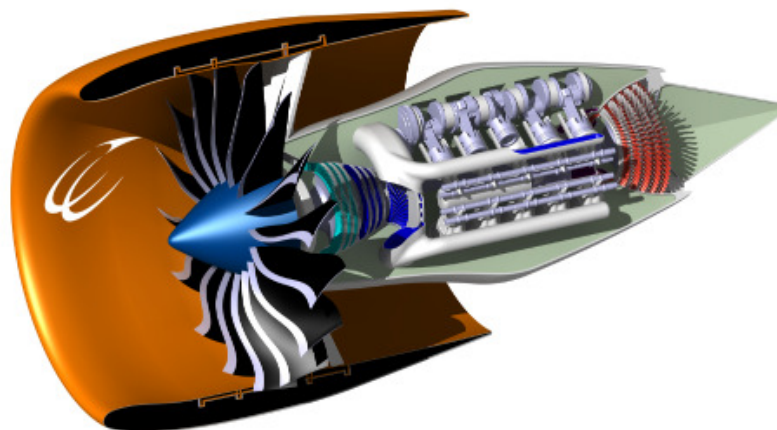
Composite cycle engine where the high pressure compressor is powered by two crankshaft-driven V10 internal combustion engines via a gearbox. It was developed by Bauhaus Luftfahrt [19, 22]
